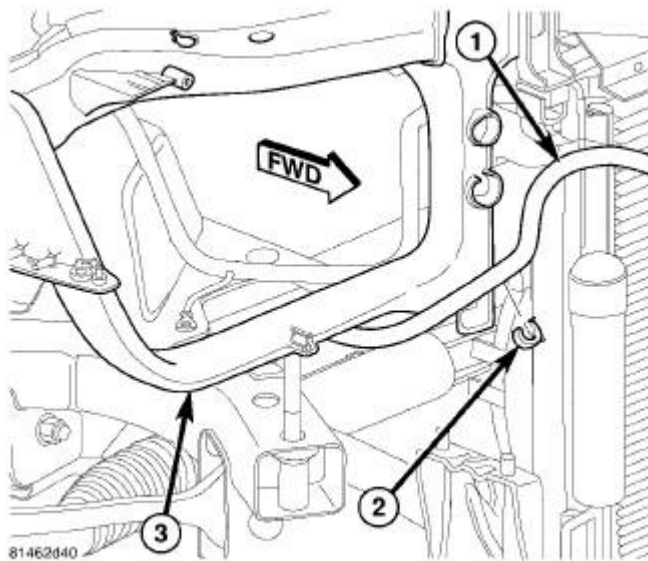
RETURN HOSE ROUTING - RIGHT SIDE RADIATOR
